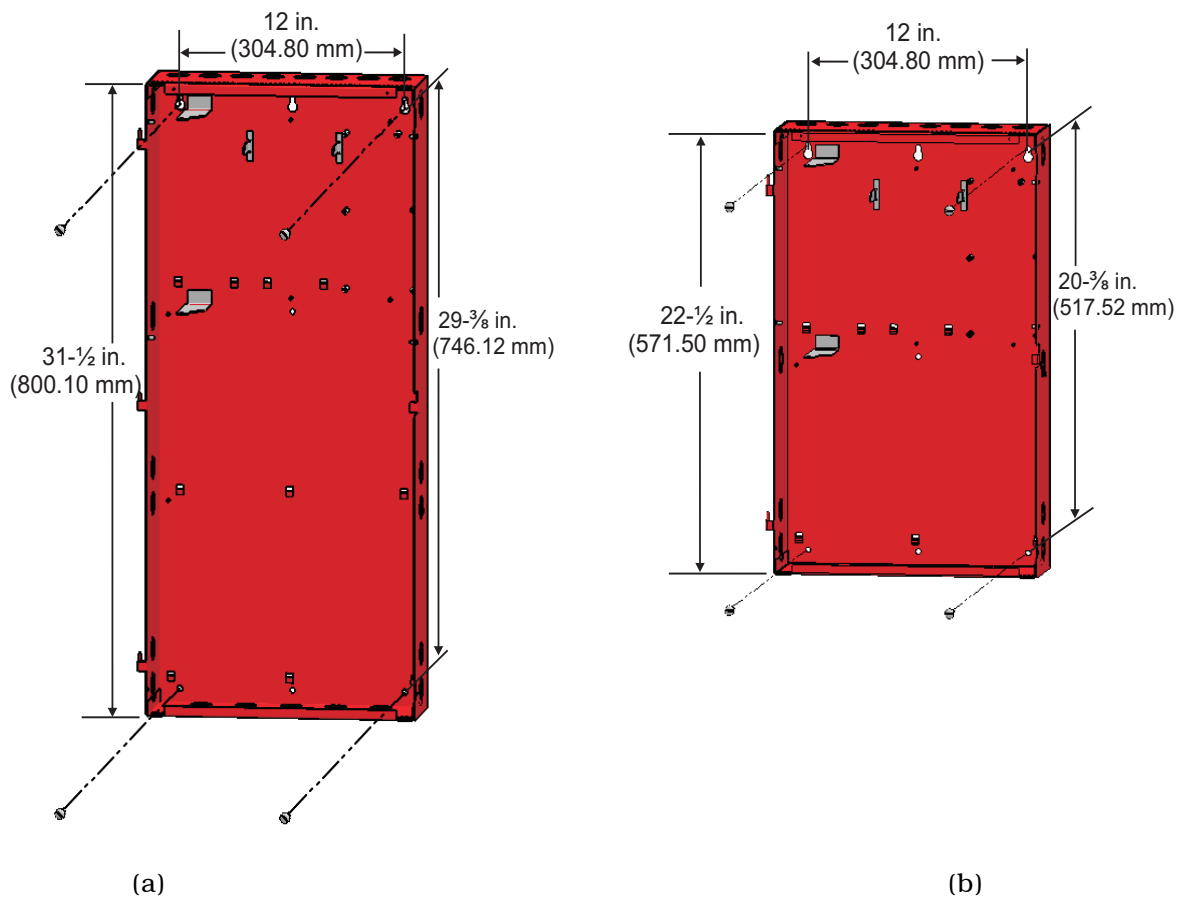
Mounting Dimensions for 3-Tiered (a) and 2-Tiered (b) Main and Expansion Enclosures
